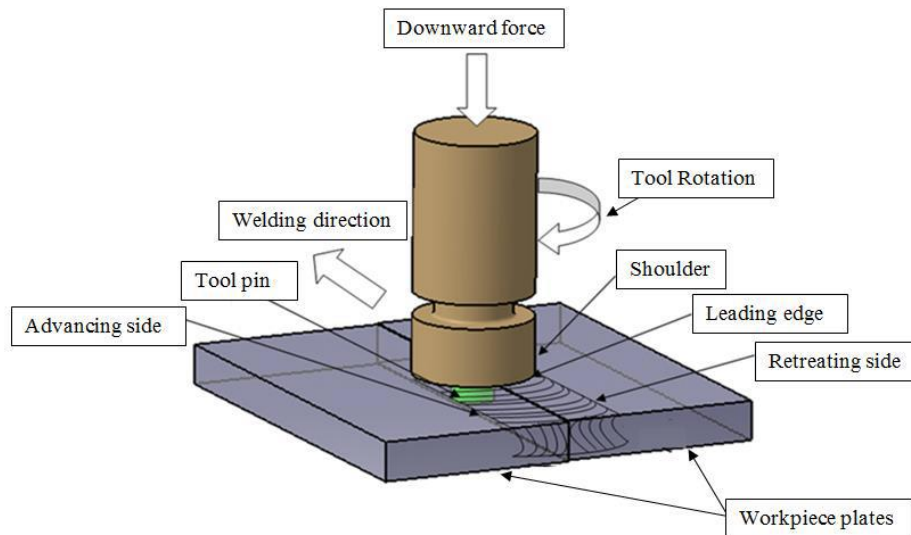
Principle of friction stir welding (Backer and Bolmsjo, 2014)
